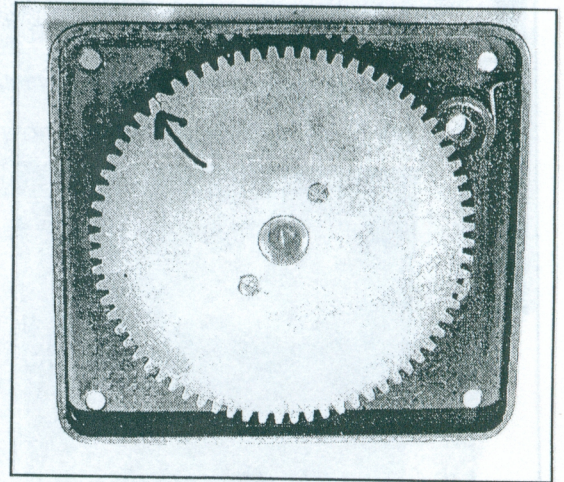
Spring tension setter gear in bottom of camera. See the hole for curtain spindle top right. Arrow points to two teeth crimped together to prevent spring from unwinding completely.
